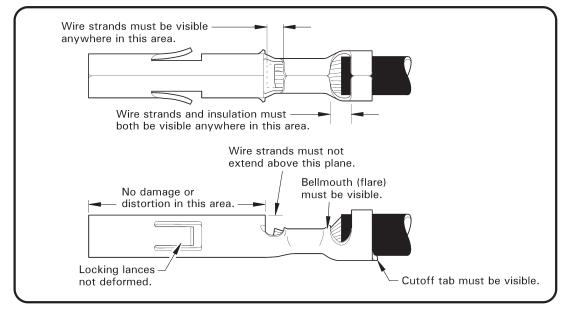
Crimp Inspection (installed socket shown)
